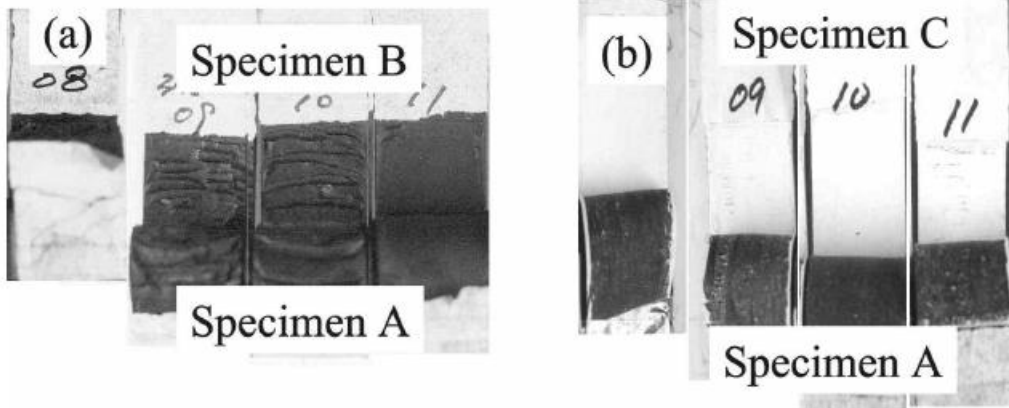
Fracture surface morphology for specimen- A/B and A/C system.
